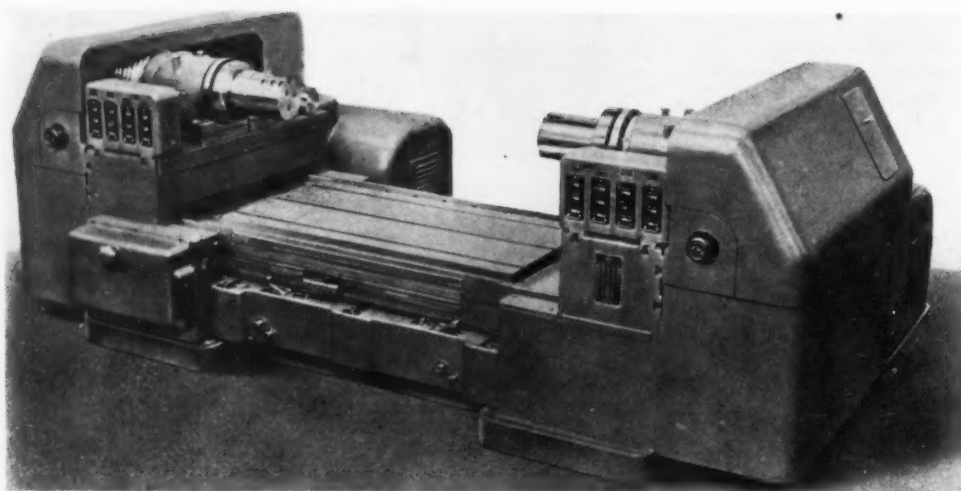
DUAL-CONTROL STATIONS ON A HEALD BORE-MATIC MACHINE
